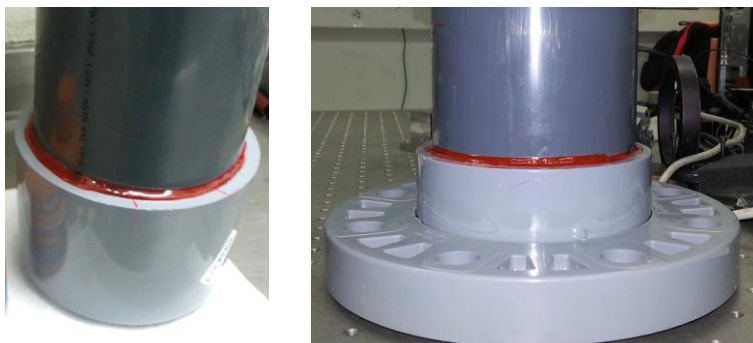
Solvent bonded cap (left) and flange (right).
